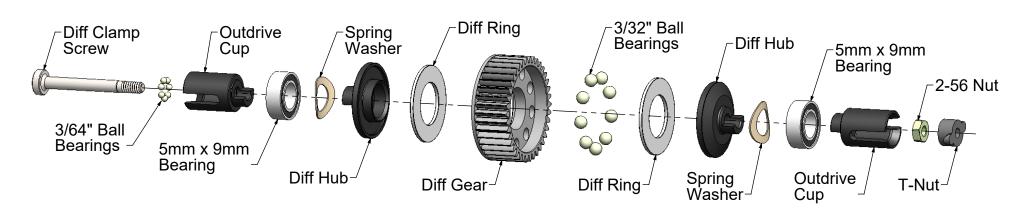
Insert the T-Nut with 2-56 Nut facing into the Outdrive Cup with a 5mm x 9mm Bearing, Spring Washer, Diff Hub & a Diff Ring. Use a small amount of "Clear" silicone grease to hold the Diff Ring in place!
